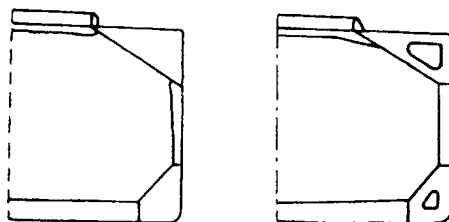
(2) Typical midship sections of bulk carriers
